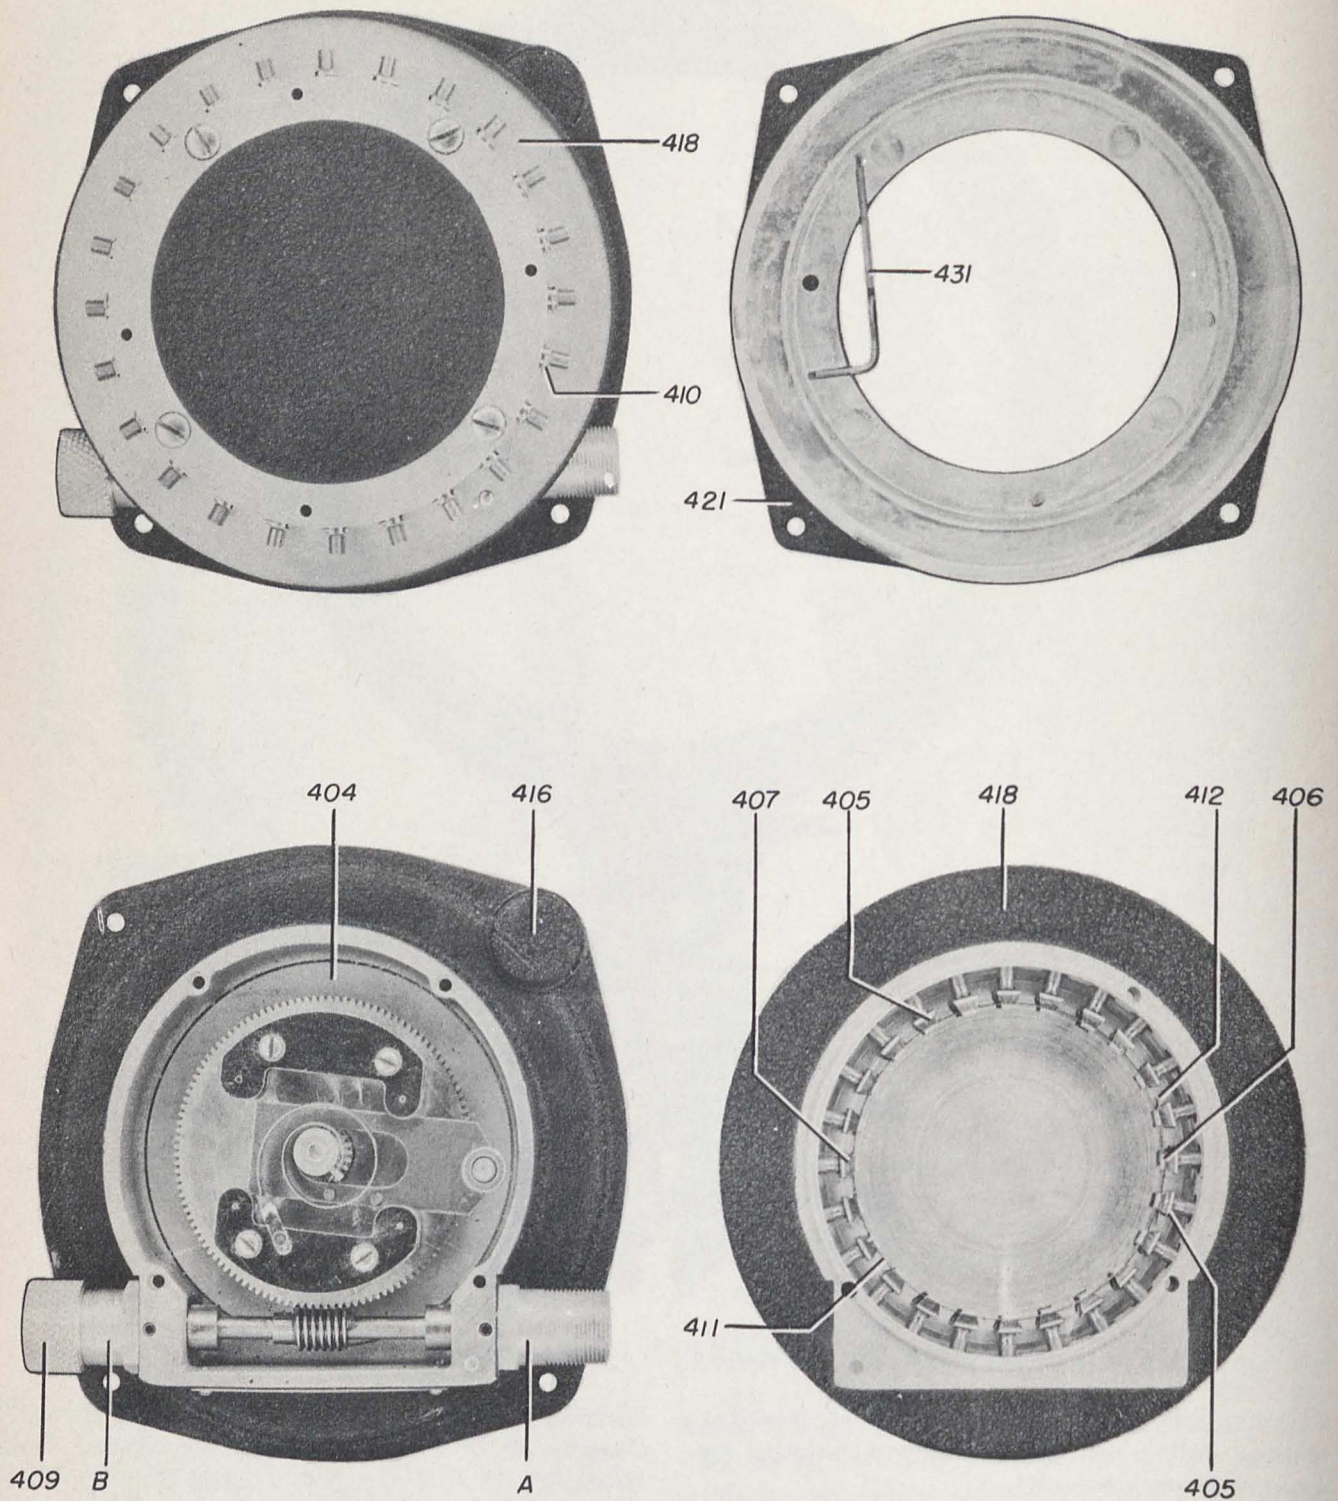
INDICATOR I-75-A (BEARING), DISASSEMBLED
